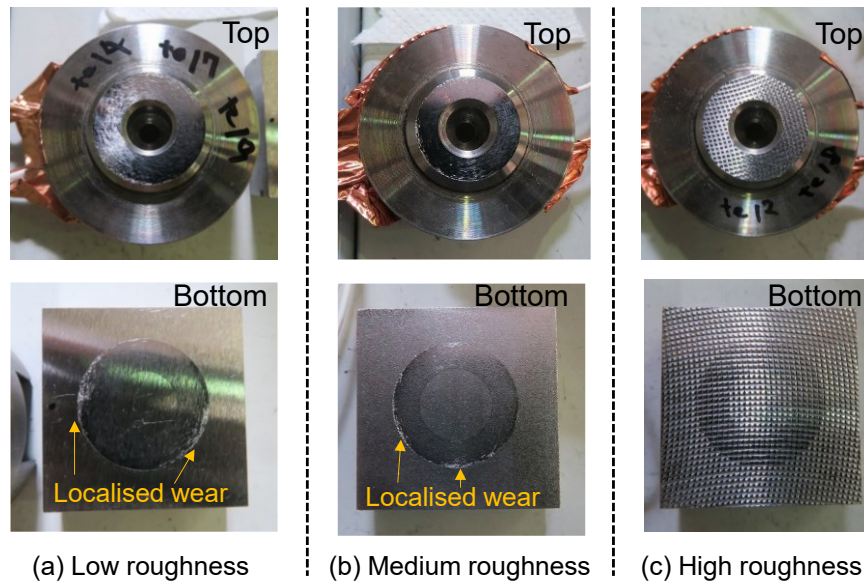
Photographs of the contact surfaces of the specimens after the tests.
